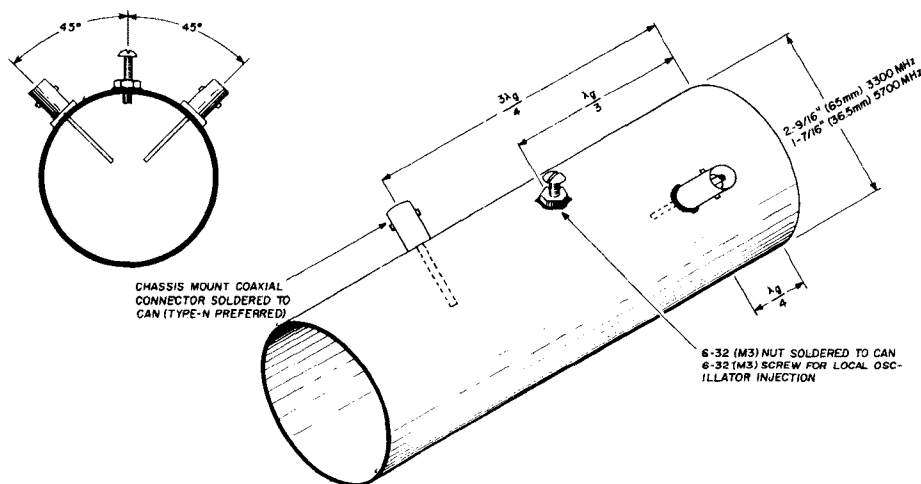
Typical polaplexer showing layout and dimensions of principle parts.
